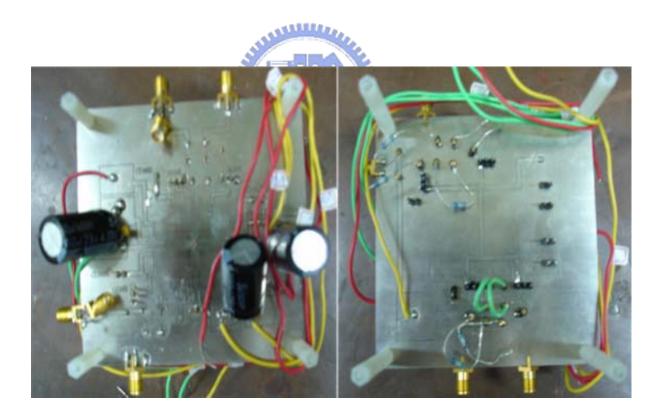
PCB Board of 2nd tap-out Internal Circuit
